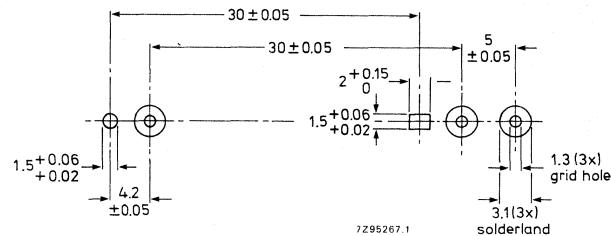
Hole pattern in the printed-wiring board, viewed from the component side.
